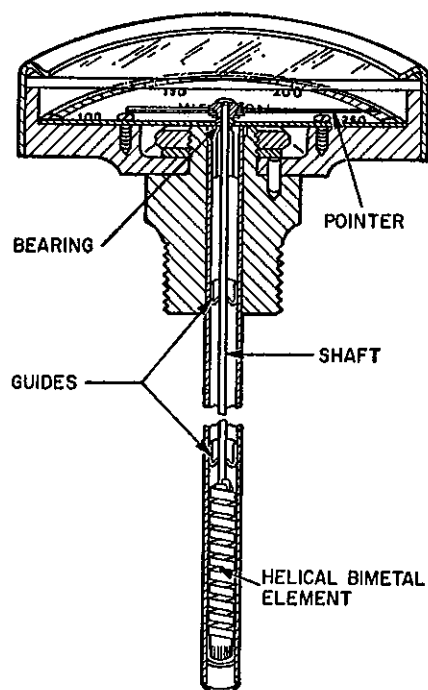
SECTIONAL VIEW OF INDUSTRIAL THERMOMETER USING HELICAL-TYPE BIMETAL ELEMENT.
